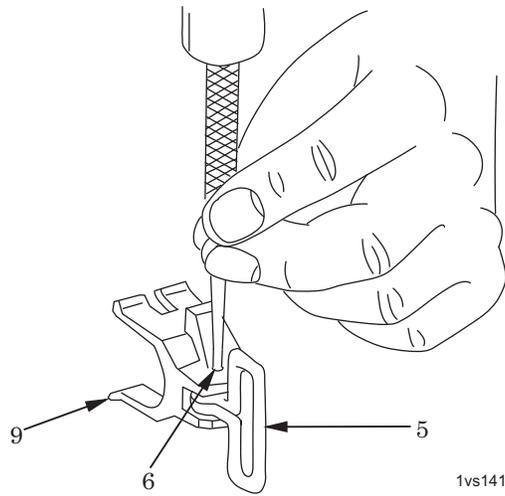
Disassembly/Assembly of Swivel Mount (Carbine).
